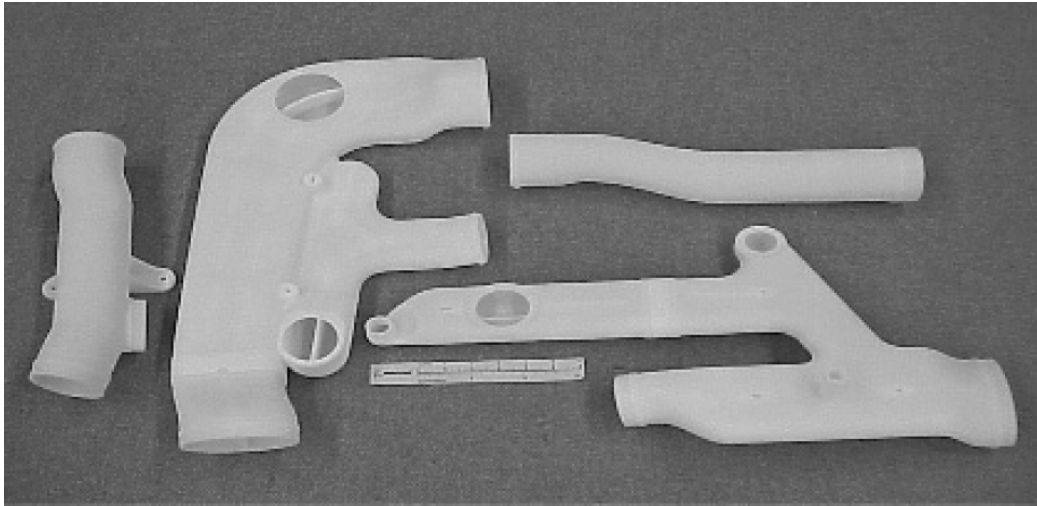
Cooling ducts for the F/A-18E/F Super Hornet manufactured from Duraform PA, produced using SLS [33].
